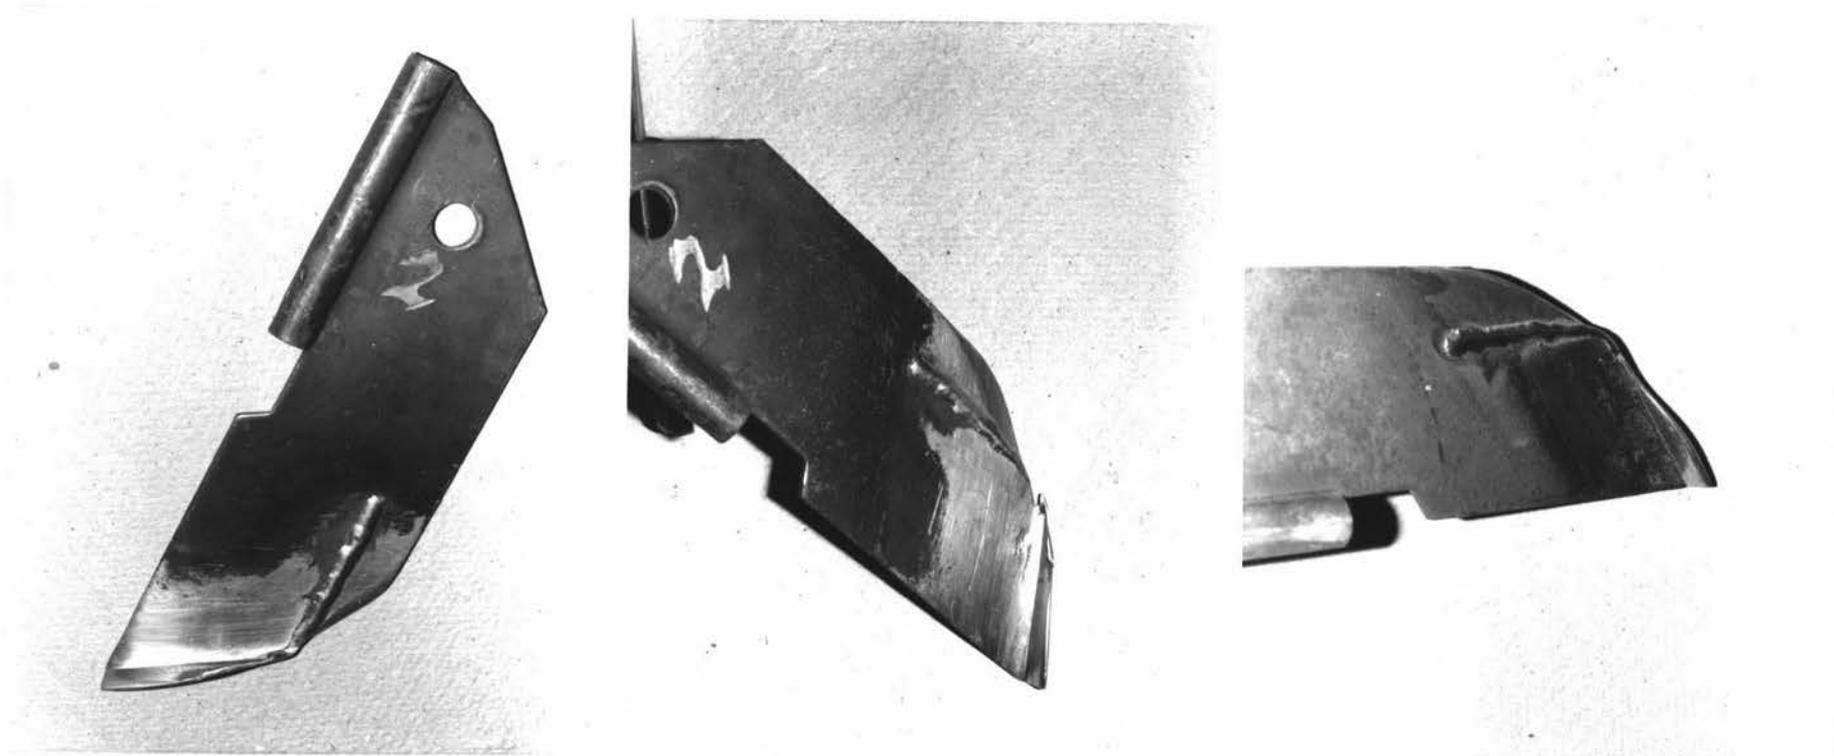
Field wear of EutecBor (-bottom pattern) welded over mild steel in Run A.
